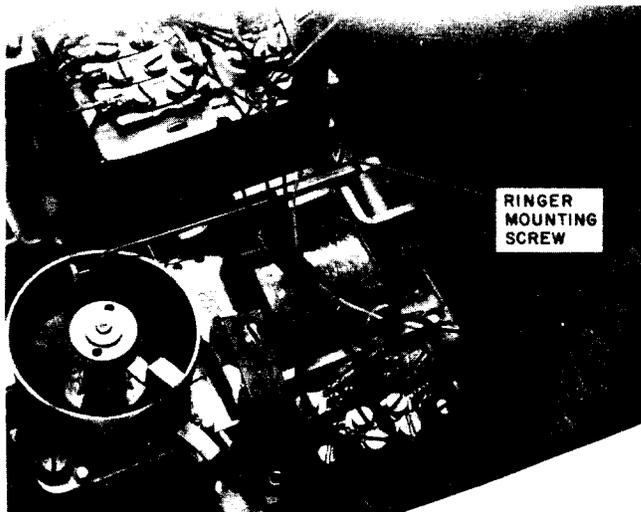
Location of Mounting Screws for D1-Type Ringers
